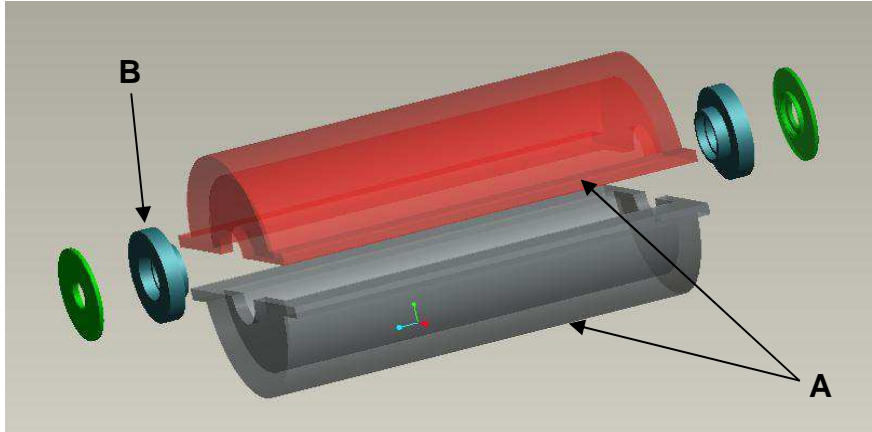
Exploded view of mill chamber. A – two symmetrical halves of the mill chamber and B – bearing and seal cartridge.
